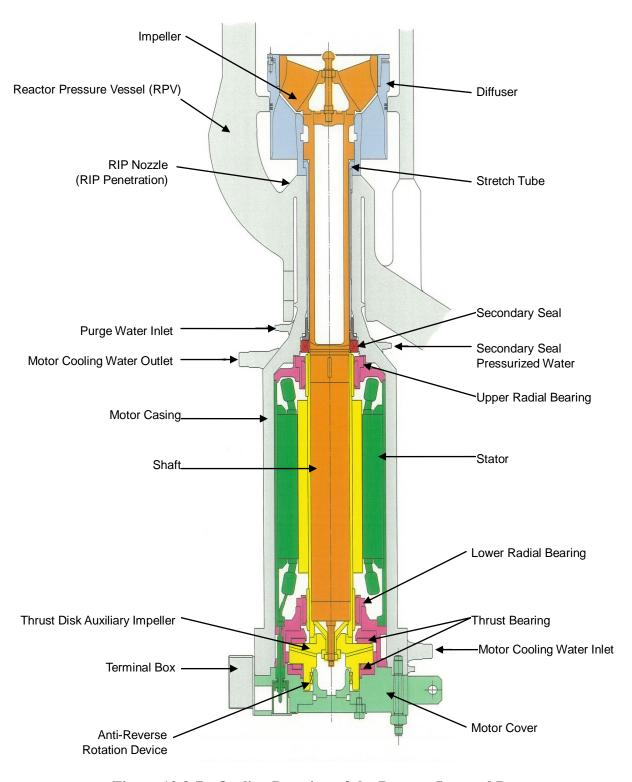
Outline Drawing of the Reactor Internal Pump
